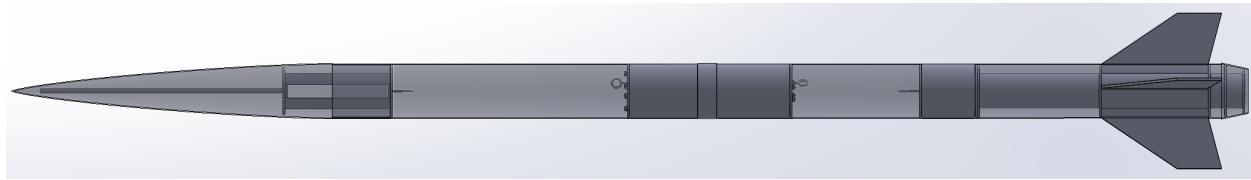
Rocketry at Virginia Tech 2023 full rocket assembly.
